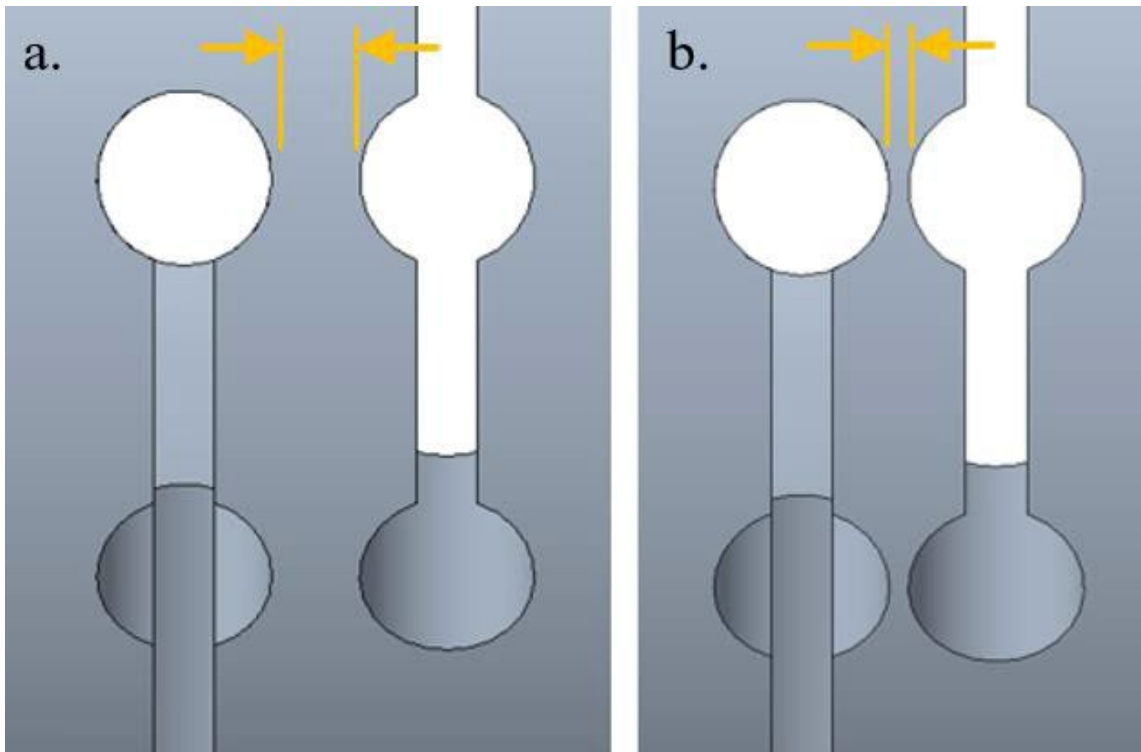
Enhanced view of roll cage flexure. (a) Original roll cage flexure dimensions. (b) 80% reduction in hinge thickness roll cage flexure.
